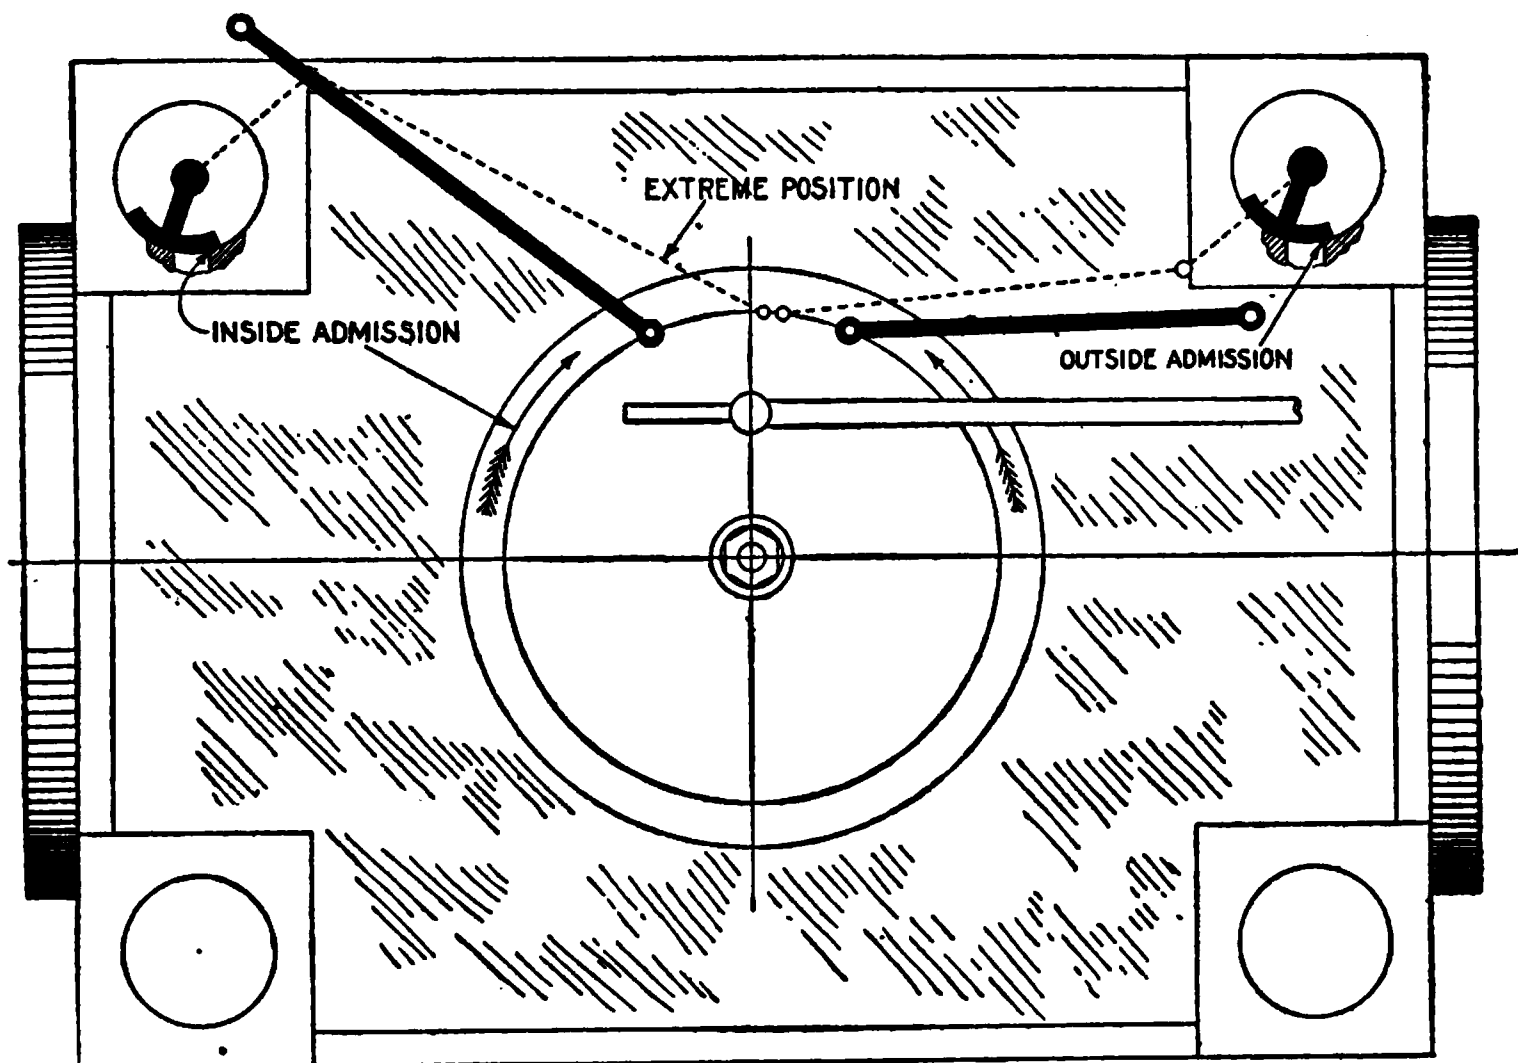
,041.—*Peculiarities of the Corliss gear.* 1, hook gear opening steam valves *outward*, gives *inside admission*; 2, hook gear opening steam valves *inward*, gives *outside admission*.
